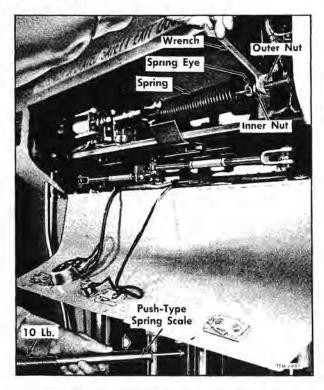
Adjusting Push-Type Rear Door Return Spring Tension
